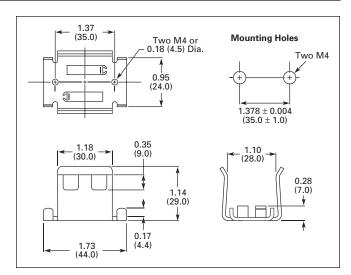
Mounting Bracket — Approximate Dimensions in Inches (mm)
